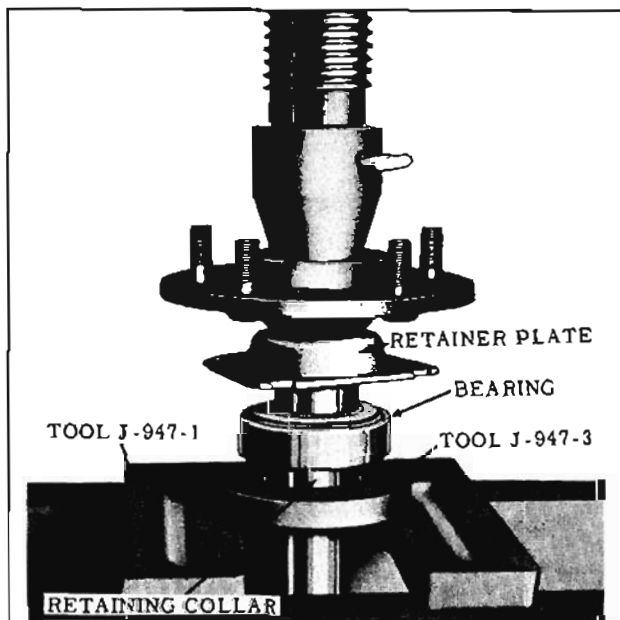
Installing Axle Shaft Bearing Retainer
